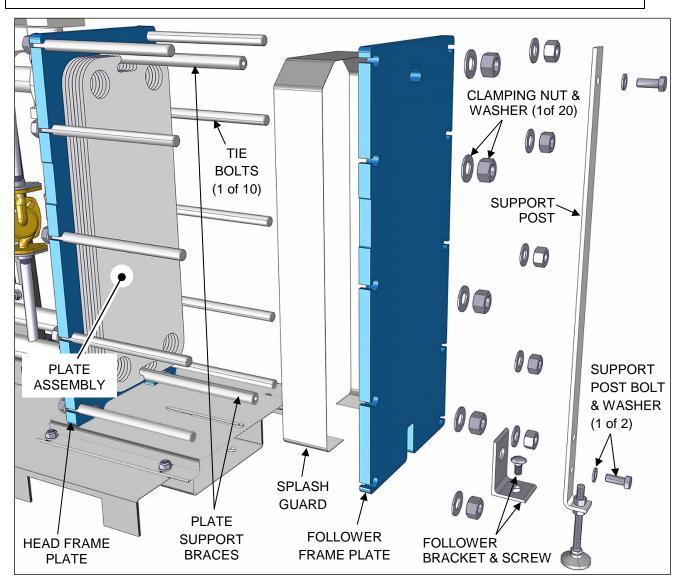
Plate & Frame Heat Exchanger Parts
